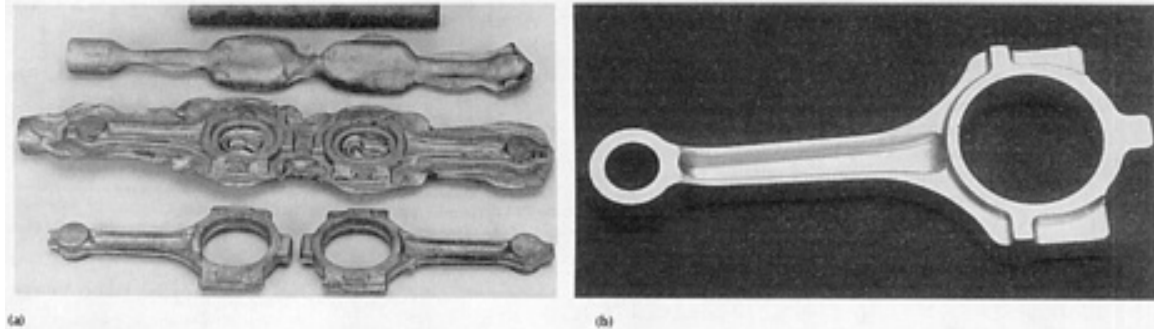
Comparison of fabrication sequence for connecting rods. (a) Typical sequence for conventional forging of rods. The pin end is forged solid and requires machining steps that P/F eliminates. (b) Powder forged connecting rod for a Ford 4.6 L V-8 engine. Note its good surface finish, near-net shape, and small weight control pad at the crank end.
